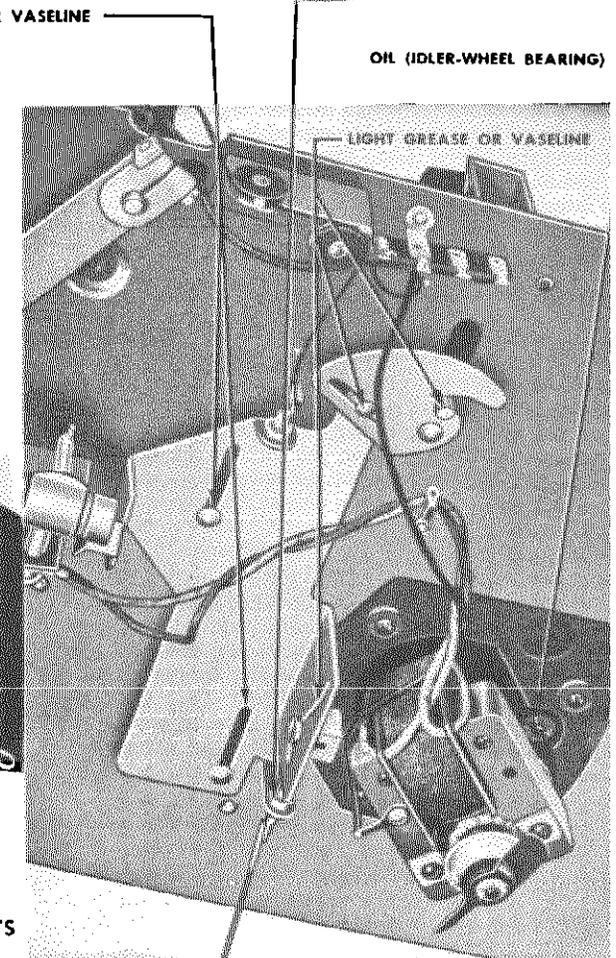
LUBRICATION POINTS UNDER MOTOR BOARD.
